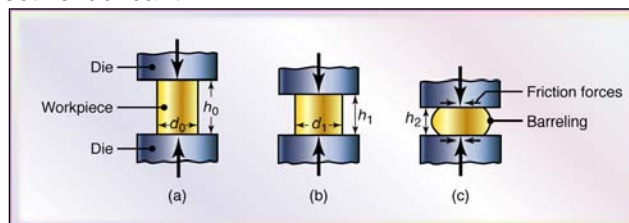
(a) Solid cylindrical billet upset between two flat dies. (b) Uniform deformation of the billet without friction. (c) Deformation with friction. Note the barreling of the billet caused by friction forces at the billet-die interfaces.
